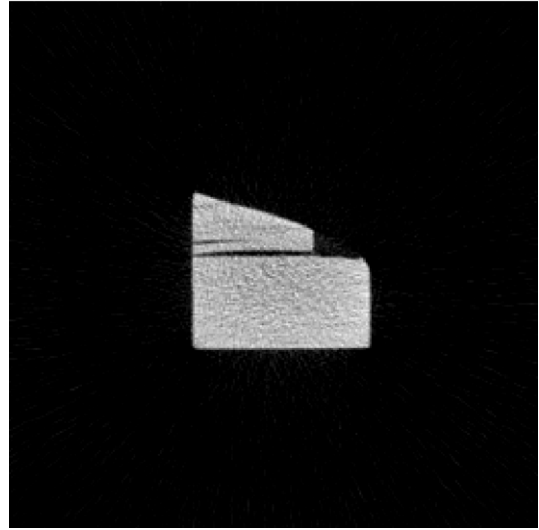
Reconstruction of the specimen C cross-section after applying correction.
